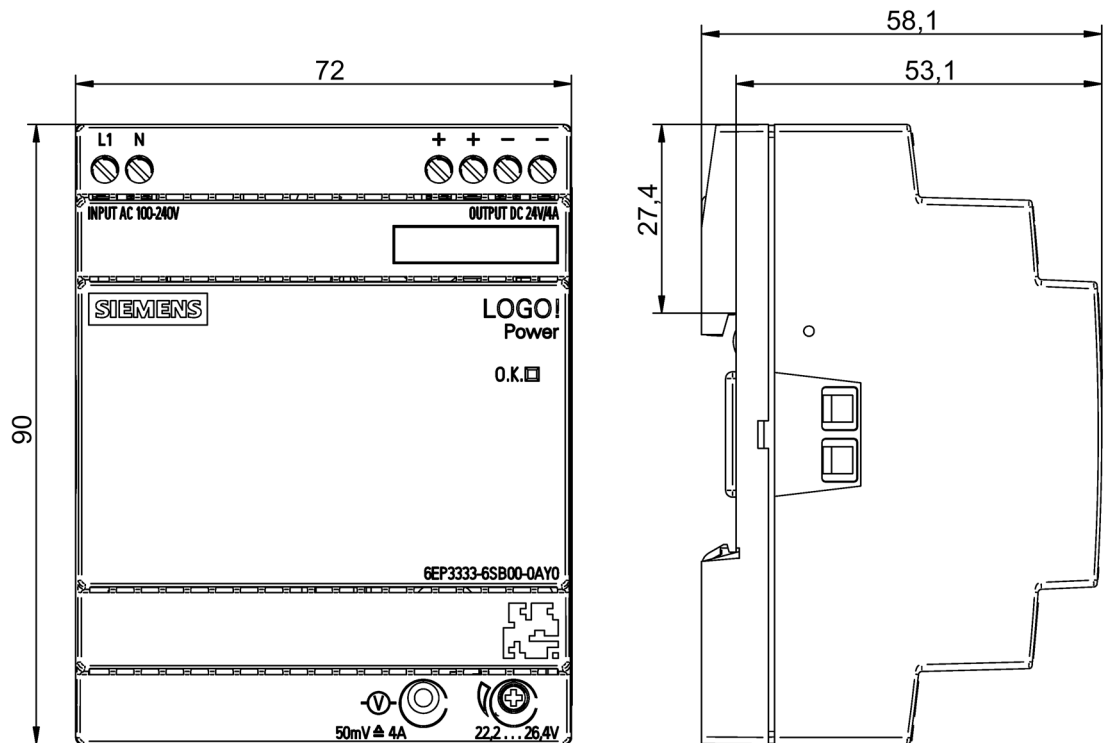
Dimension drawing for 6EP3333-6SB00-0AY0
